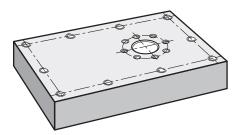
Example workpiece – programming a bolt hole circle and a row of holes
